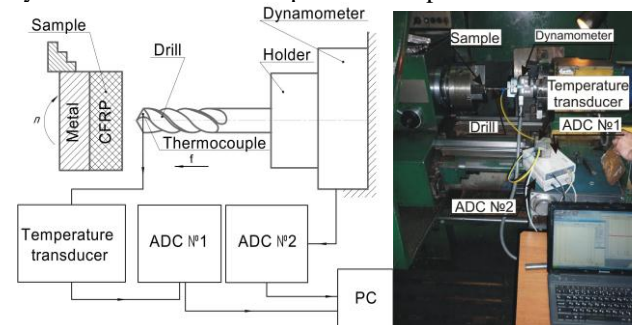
Drilling experimental set up at CNC Lathe machine 16B16T1
